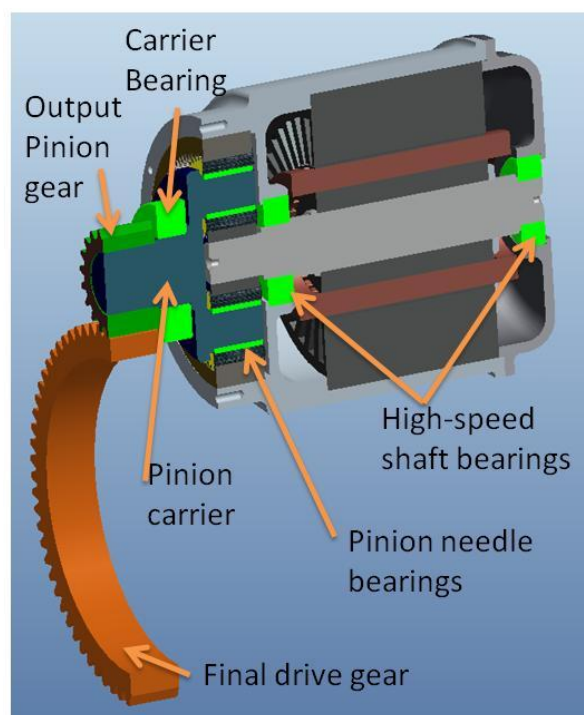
Section view of 23,000 rpm ORNL matched driveline concept.
